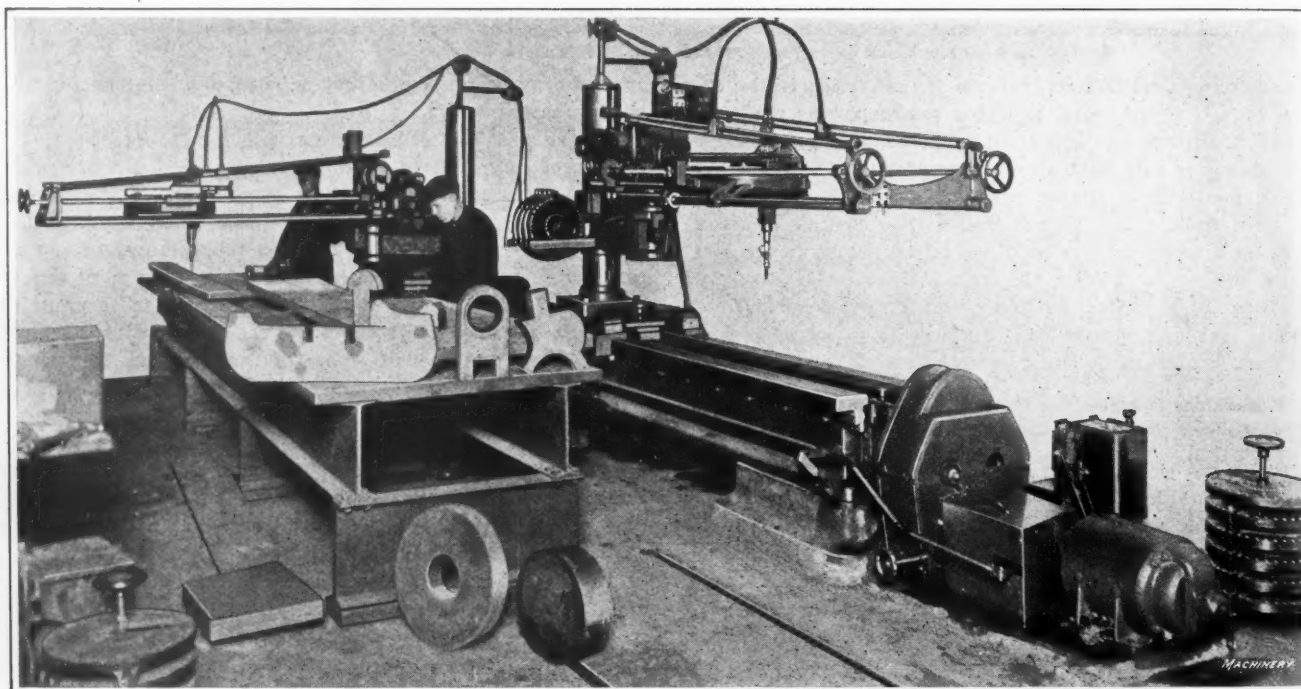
Double-head Automatic Universal Cutting Machine mounted on Bed which affords Traverse Movement in Addition to Movements Available on Machine shown in Fig. 10
